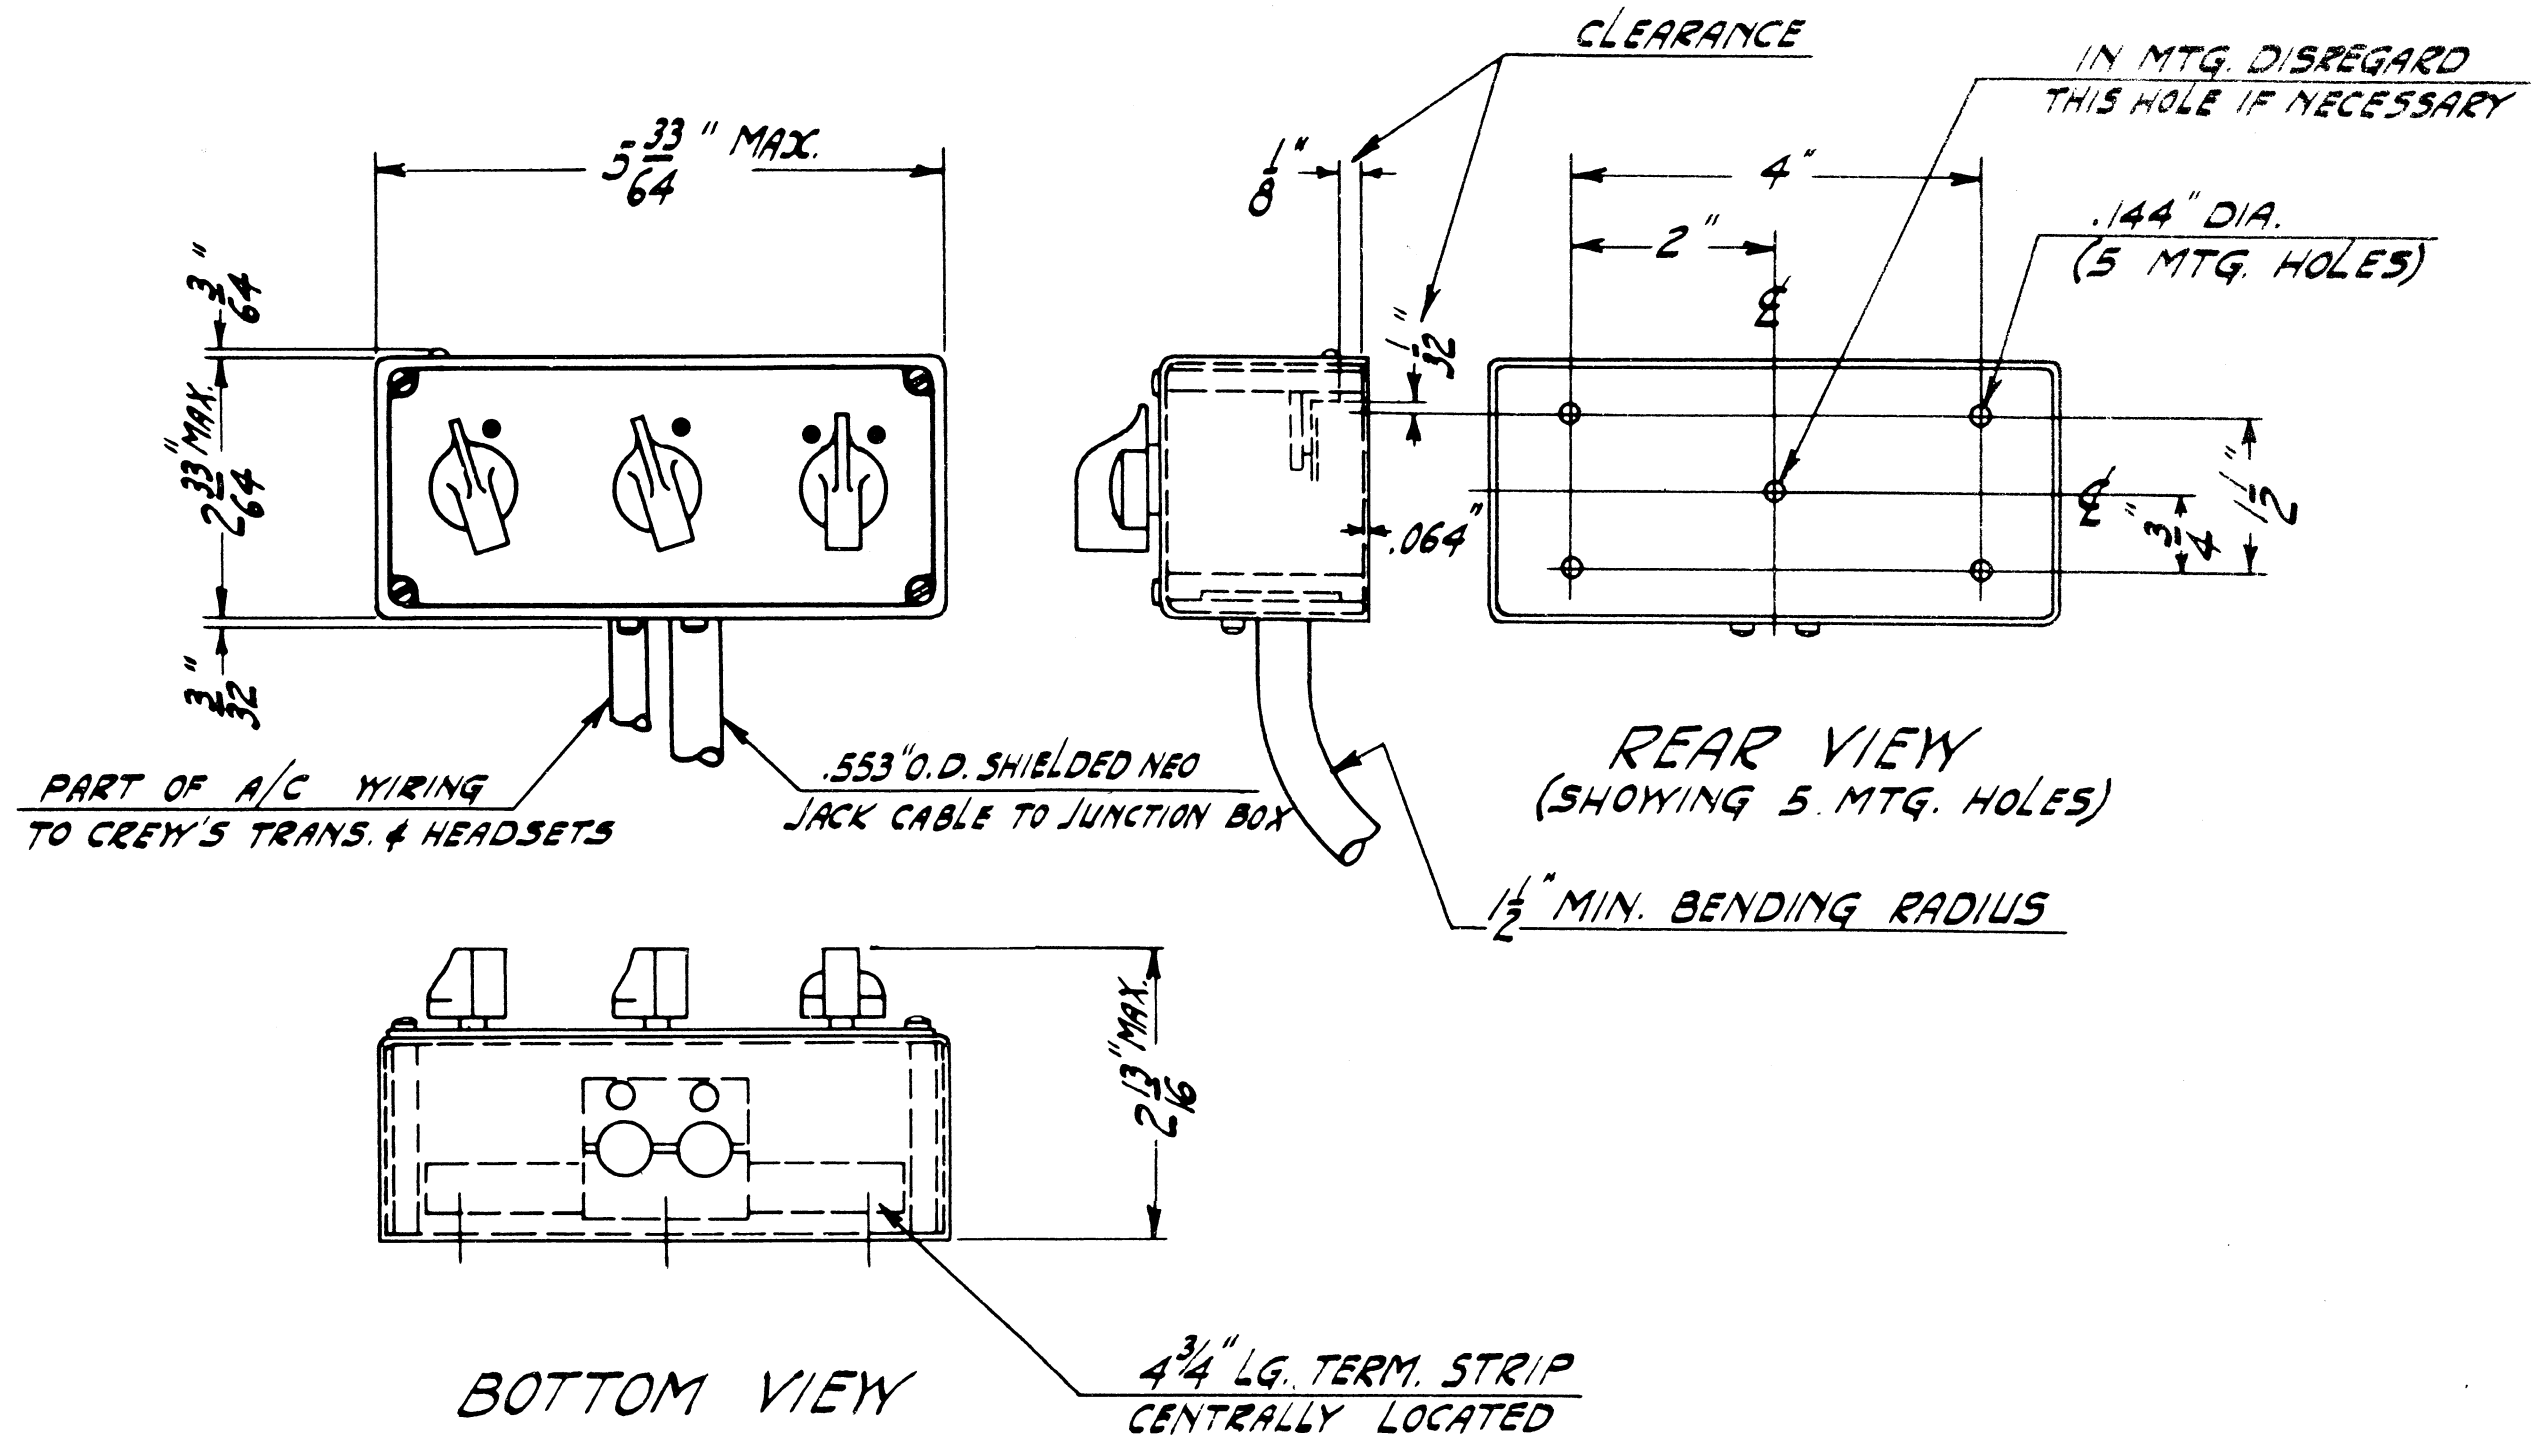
OUTLINE DIMENSIONS - 1/C SWITCHING UNIT
